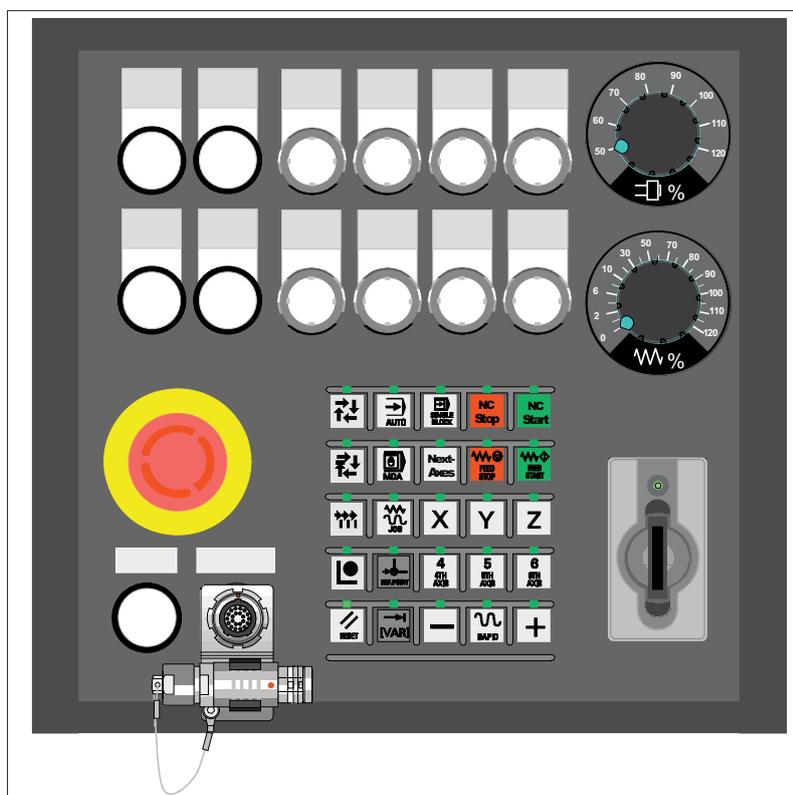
MPP 310 IE H Machine Pushbutton Panel
